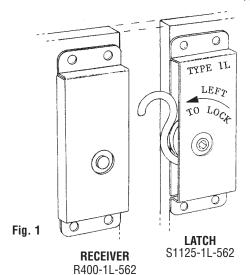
A & 11B Type 1R & 1L Latches and slot Receivers to quickly attach and remove machine guards, etc. Key operated for safety. (See TDS 23)
